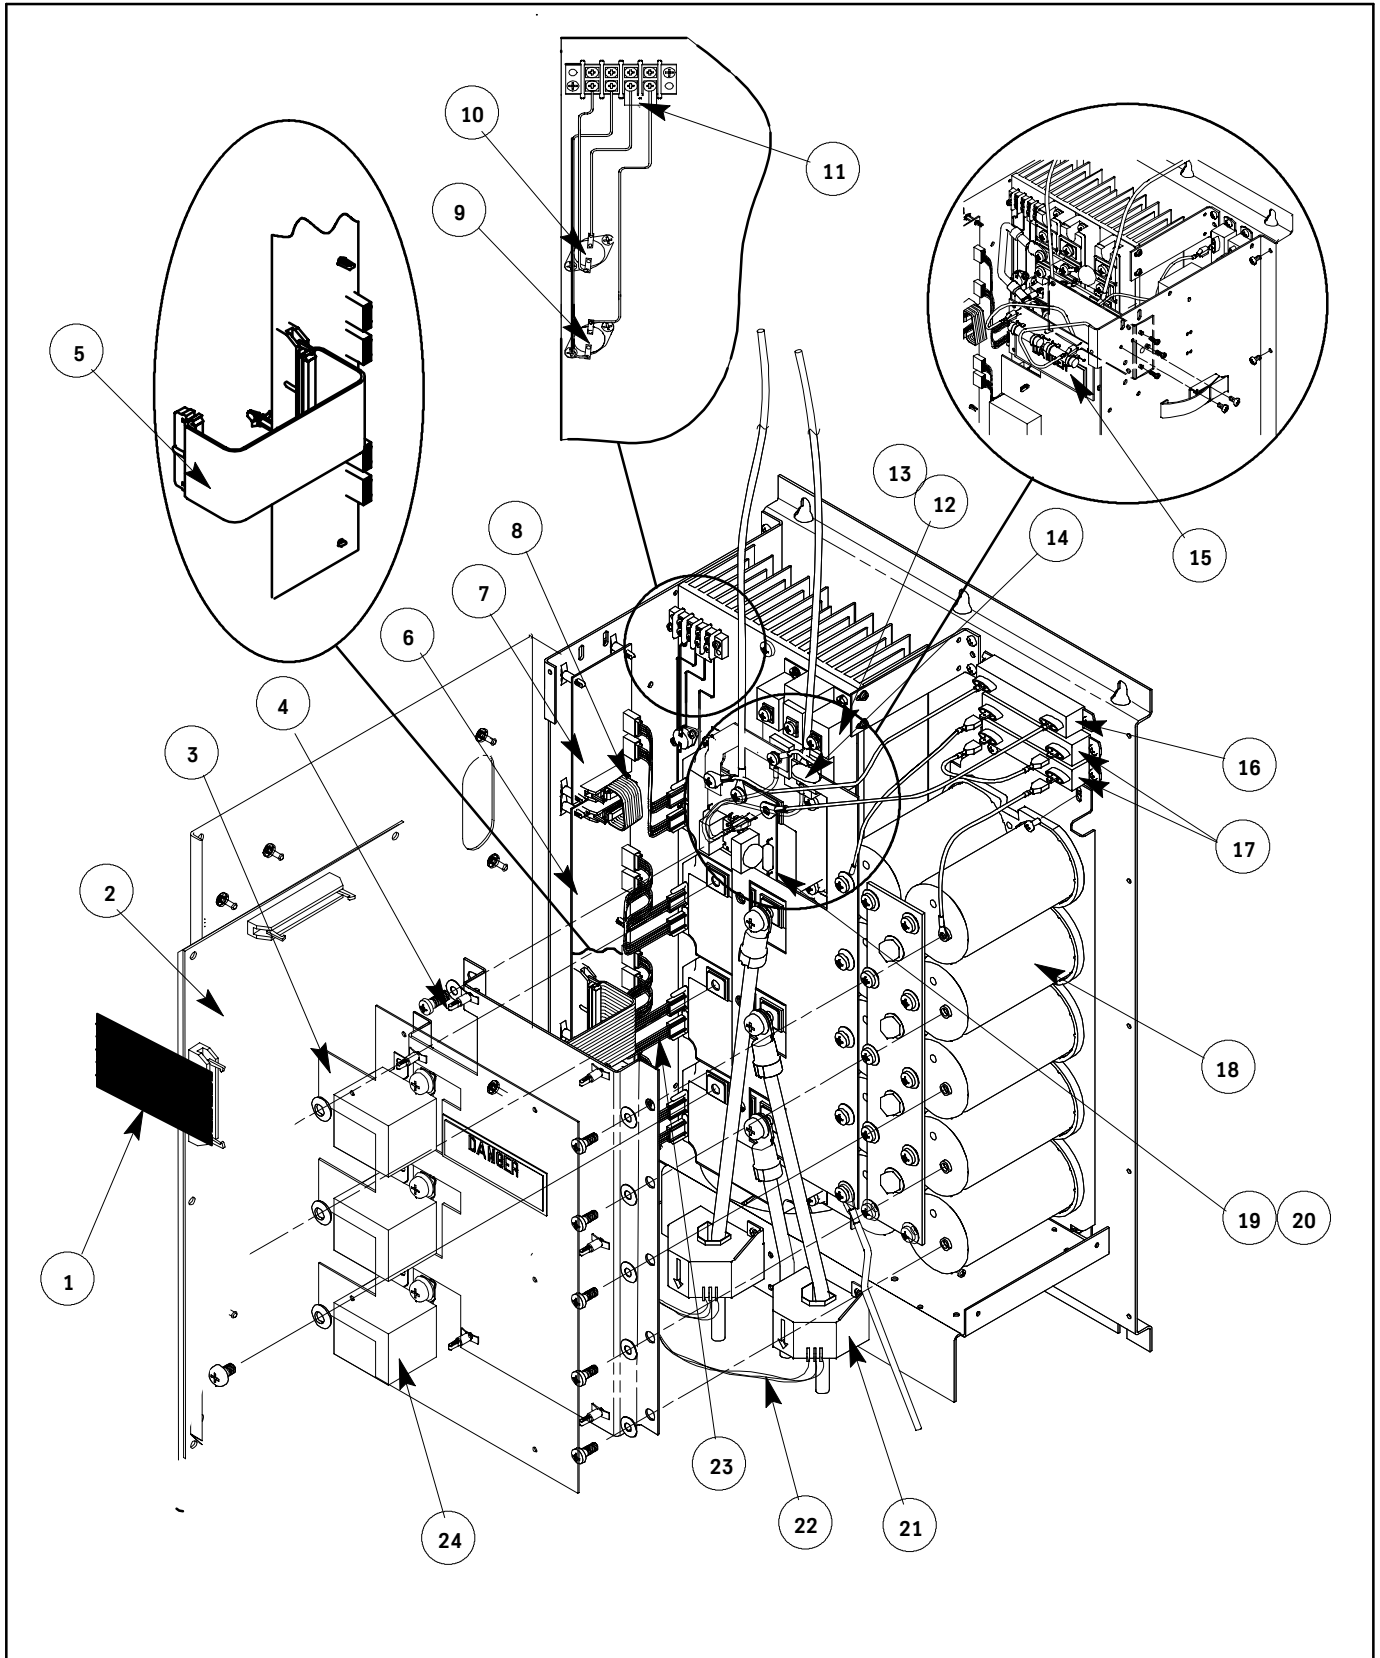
2109AL, 40-60HP, 460V, Stand Alone, Non-Regenerative, Drive Assembly
